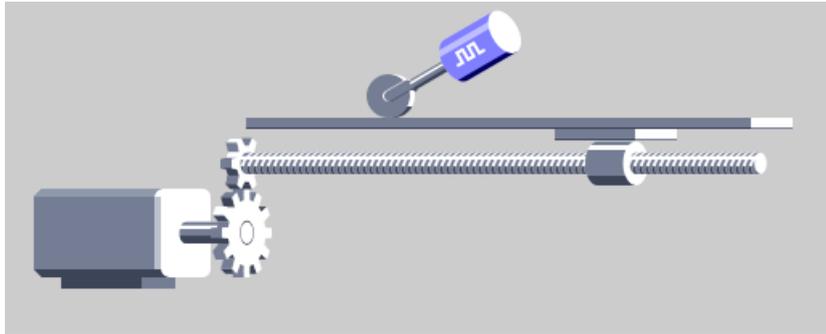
Encoder mounting type load side linear axis, measuring system linear
